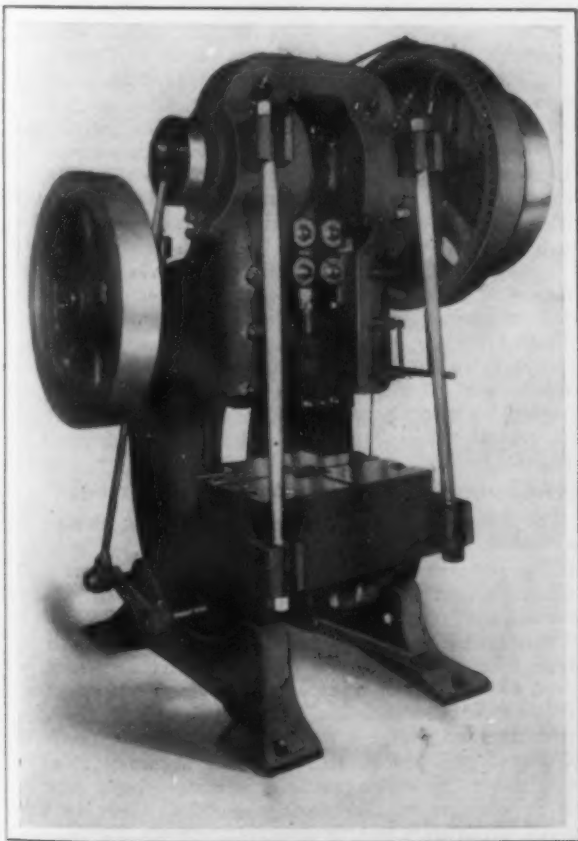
Front View of the New No. 6-B Back Geared Power Press
